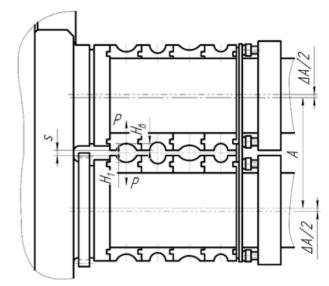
Roll springing in hot forge-rolling of billets in calibers.
